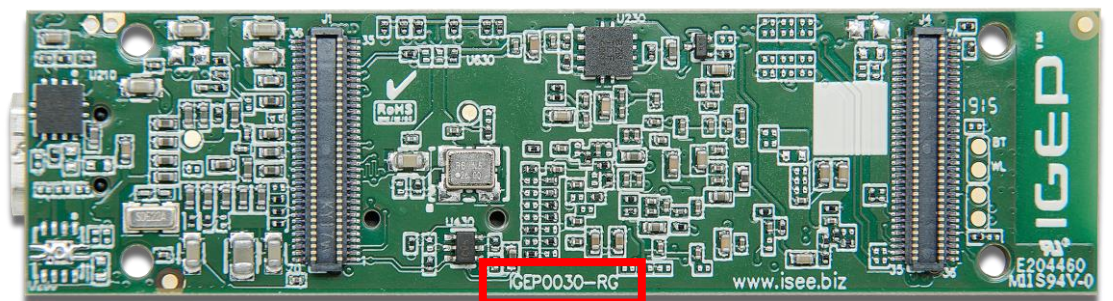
IGEP™ COM MODULE AM3703 RG version board bottom side components
